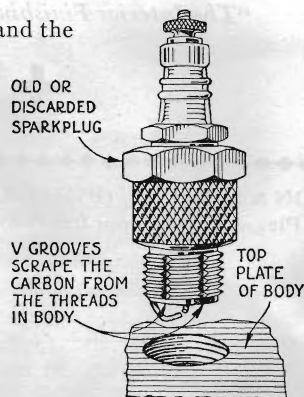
Using an old spark plug to remove carbon from threads of spark plug hole.
